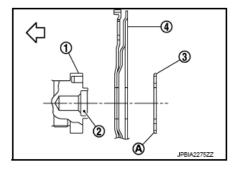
Locating Drive Plate, Reinforcement Plate And Pilot Converter Courtesy of NISSAN NORTH AMERICA, INC.
